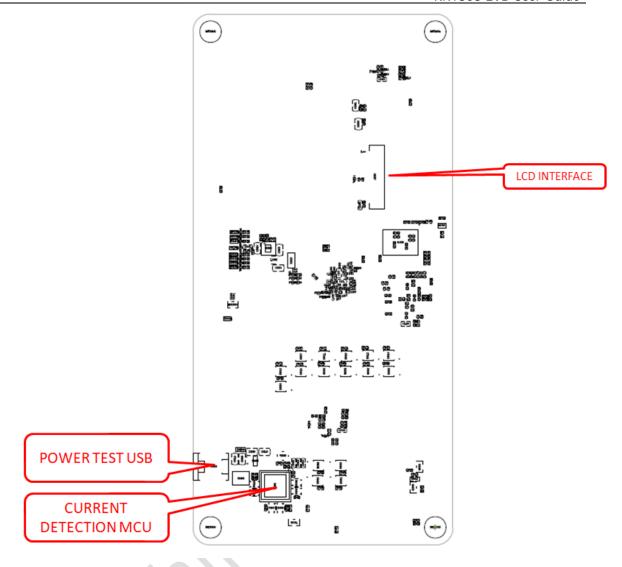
Modules layout of RK1808 EVB 1.1 PCB bottom Layer
